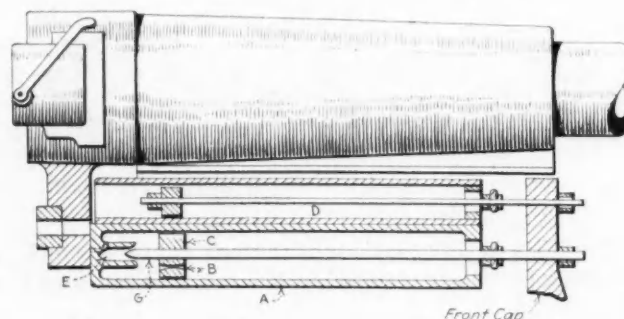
CROSS SECTION OF TYPICAL RECOIL MECHANISM OR RECUPERATOR
